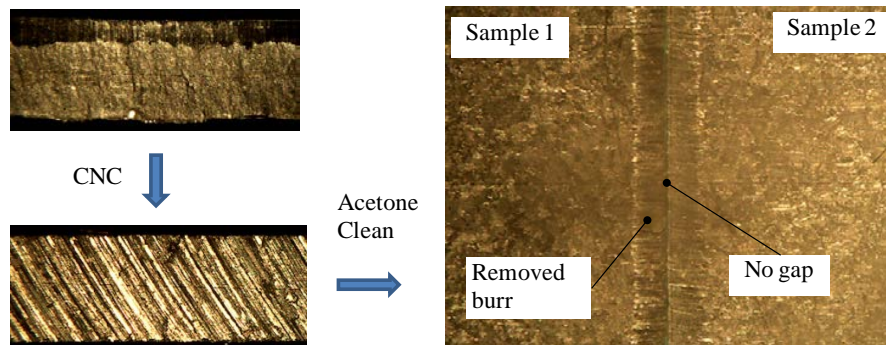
Cutting surface preparation for pre-welding inspection by using computer numerical control (CNC).
